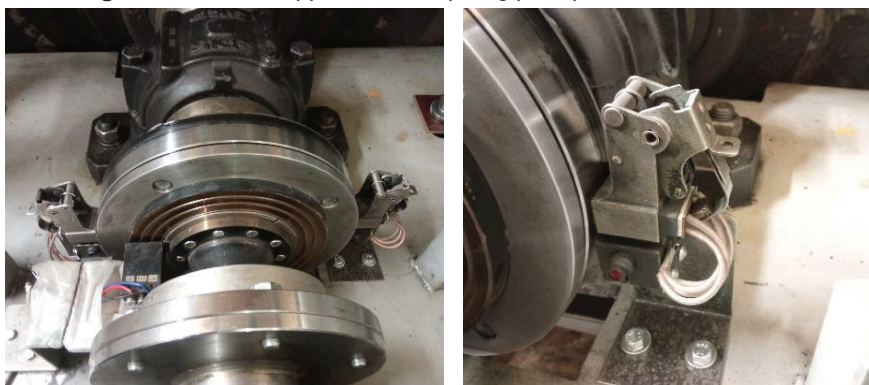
Galvanic stripping of the lower wheel. On the left: the base plate of the lower wheel, on the right: the insulation of the cardan shaft flange and insulation the screws
